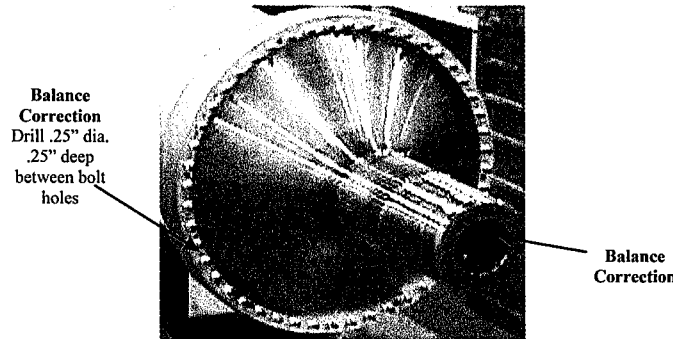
Weight Removal Location for Forward Sub Assembly Balance
